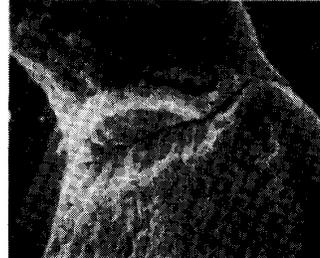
Worst-case brittle fracture: 0.2-gf die heel break.
